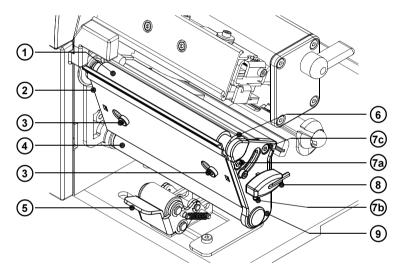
Changing Print Roller and Rewind Assist Roller (I)
